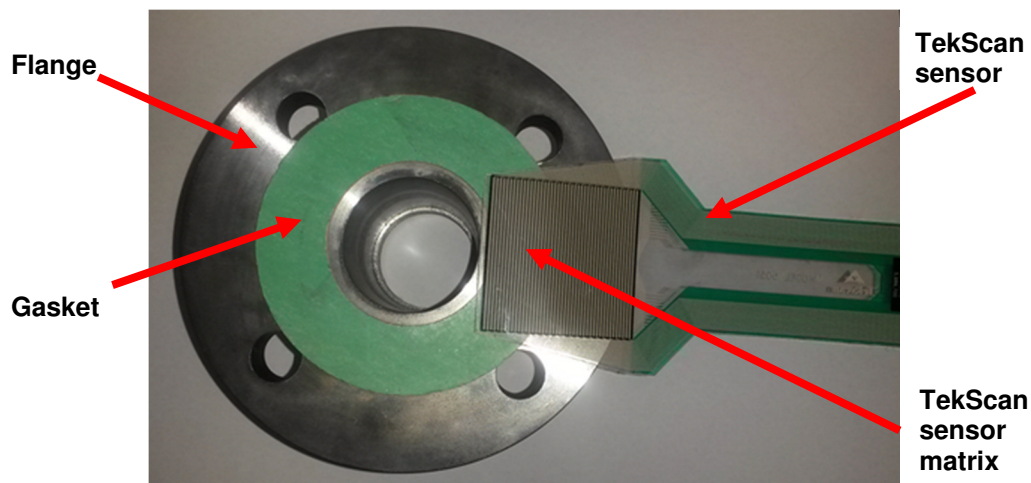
TekScan sensor model 5051-10 000 and how it was positioned in the flange assembly for the experimentation
